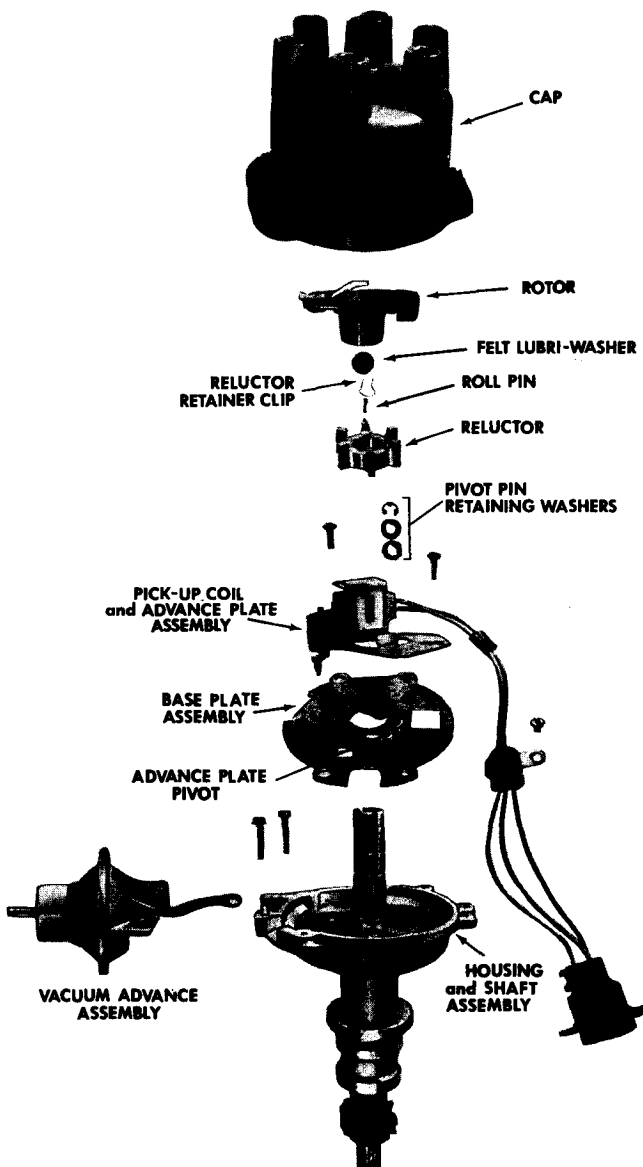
PARTIAL EXPLODED VIEW • 6 Cyl. distributor
